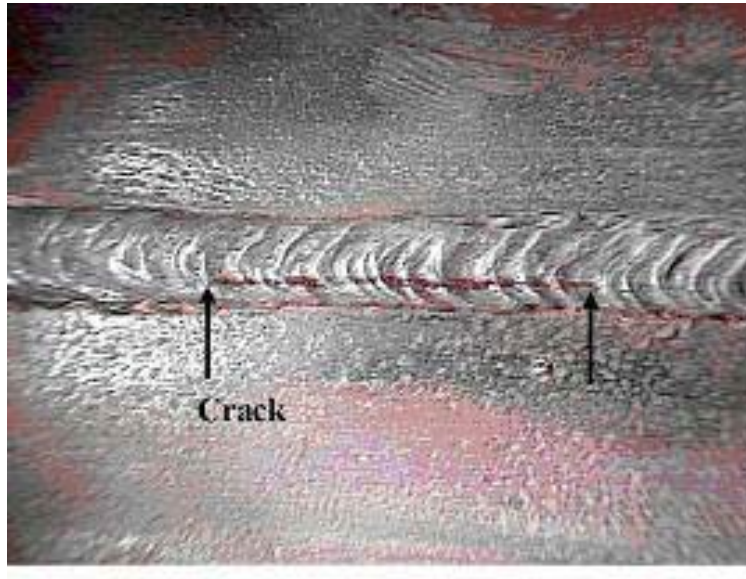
Longitudinal fatigue crack in weld [8].
